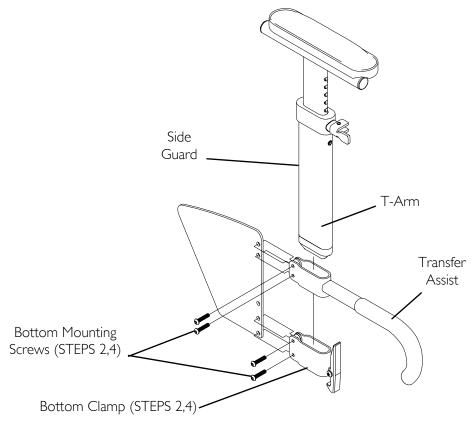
Adjusting the Transfer Assists and/or Side Guards
